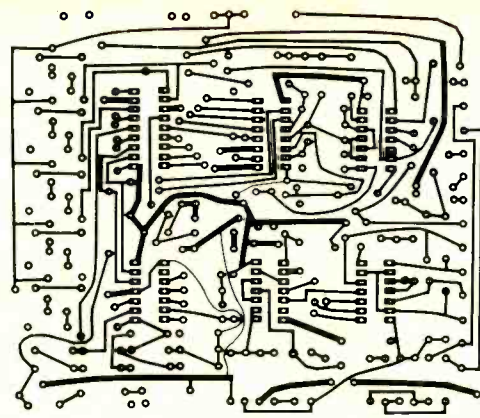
FOIL PATTERN of bottom-side of PC board shown half size.
